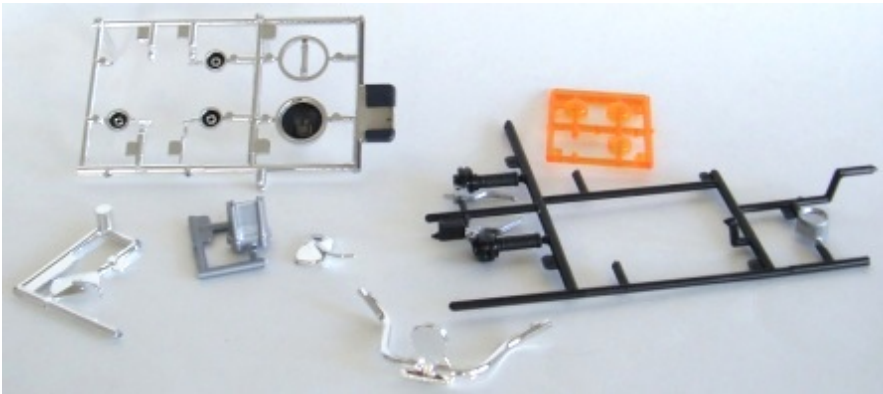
and 1727 The spacer and speedometer are painted Testors Silver. The left and right grips are painted; Testors Silver, Model Master Flat Black, and Model Master Semi Gloss Black. The handle bars will be glued to the spacer. The left grip is glued to the handle bars. The turn signal lens is glued to the turn signal assembly with Testors Clear Parts Cement & Window Maker. The turn signal assembly is glued to the left grip. The left mirror is glued to the left grip. The speedometer is glued to the handle bars. Decal 2 is applied to the speedometer. The right grip is glued to the handle bars. The turn signal lens is glued to the turn signal with Testors Clear Parts Cement & Window Maker. The turn signal assembly is then glued to the right grip along with the right mirror.
